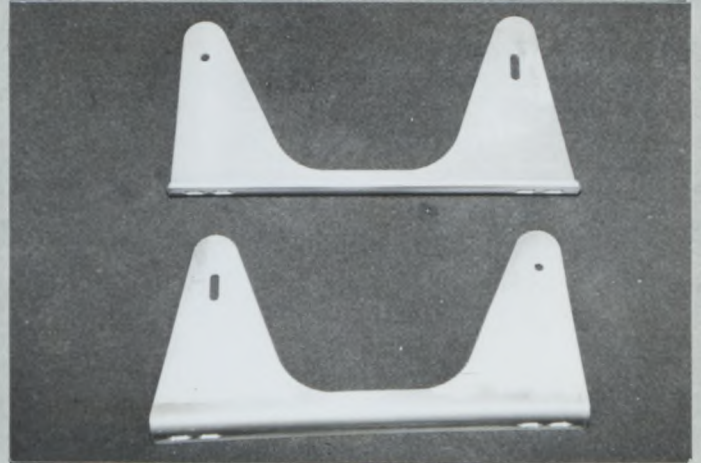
(SEATS ANCHORAGE POINTS)
